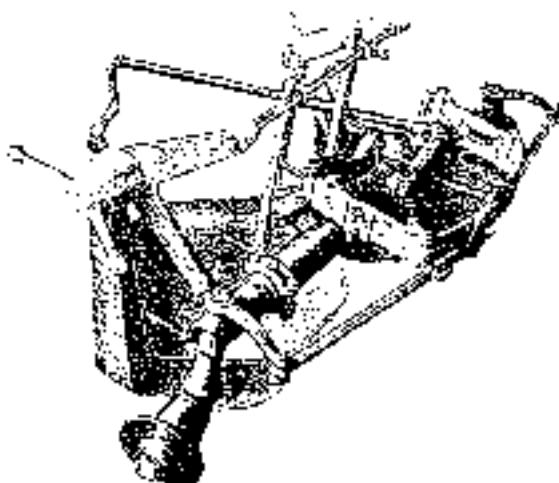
Front axle mounted on rotary stand for overhauling.
